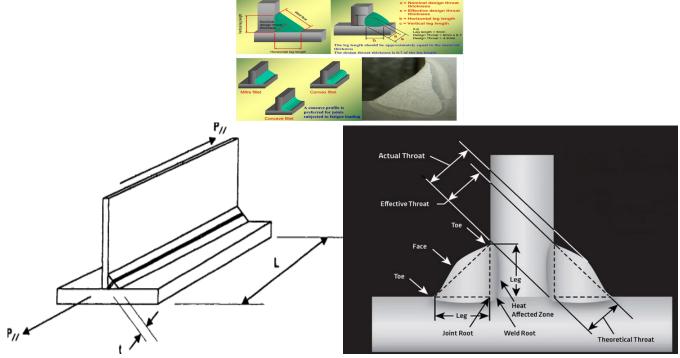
,3,4 explains t-joint welding process and nomenclature.
